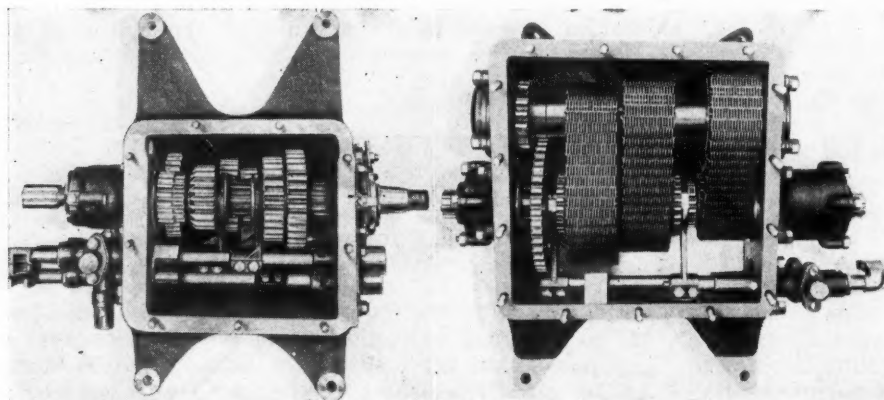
(left)—Four-speed gearset, used on some chassis built by the Fifth Avenue Coach Co. Fig. 11 (right)—Three-speed chain transmission used on other chassis of same make
